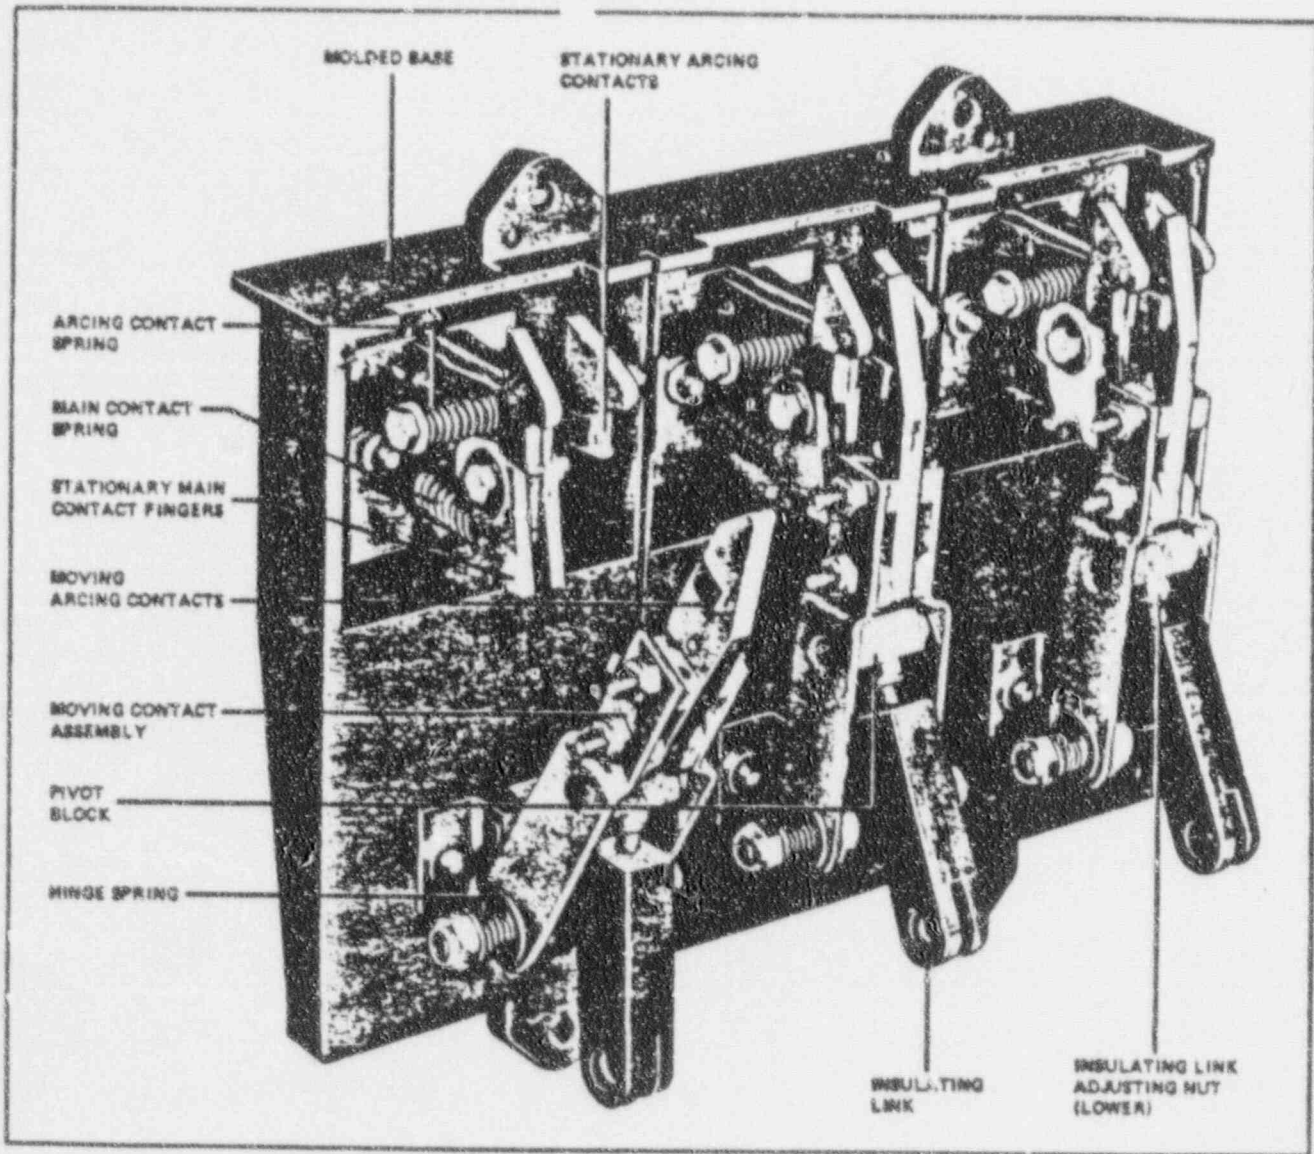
Type DS-206 Pole Unit Assembly - Front View (384502)
